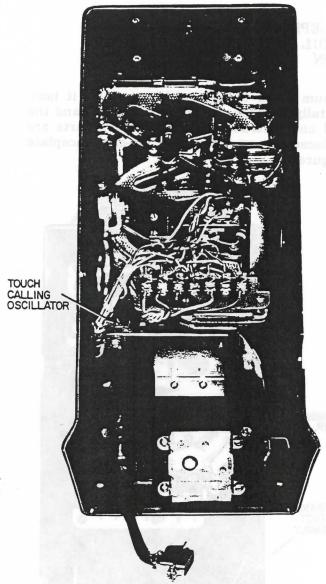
Upper Housing Assembly, LPC72-55 Coin Telephone Set.
